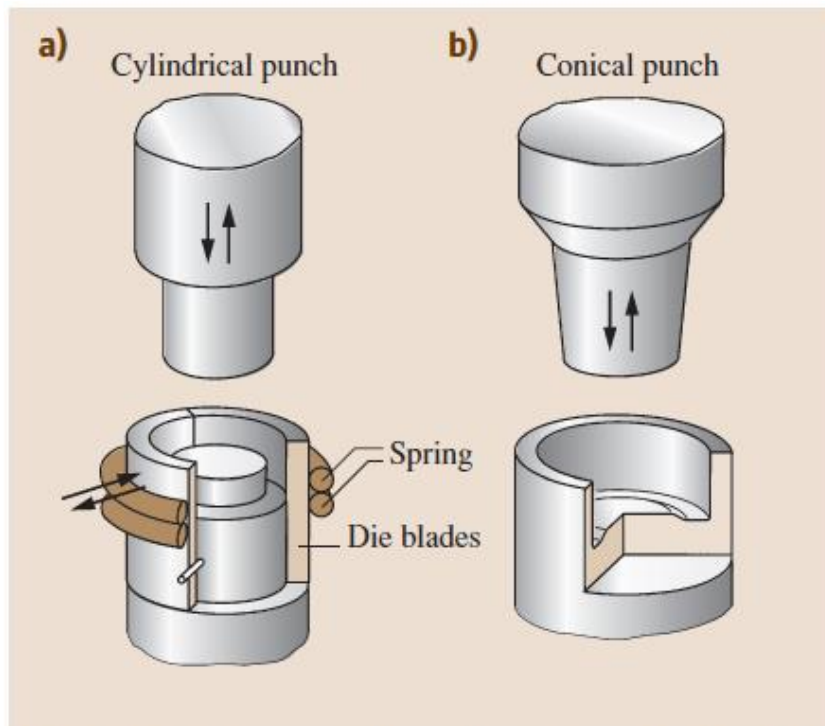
,b Examples of clinch tool sets (after [7.235])
